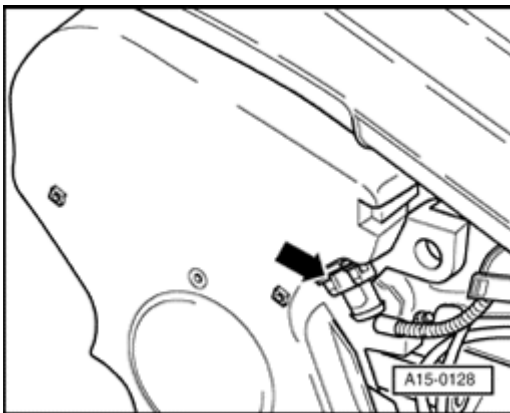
Locating Connector At Camshaft Position Sensor G40
